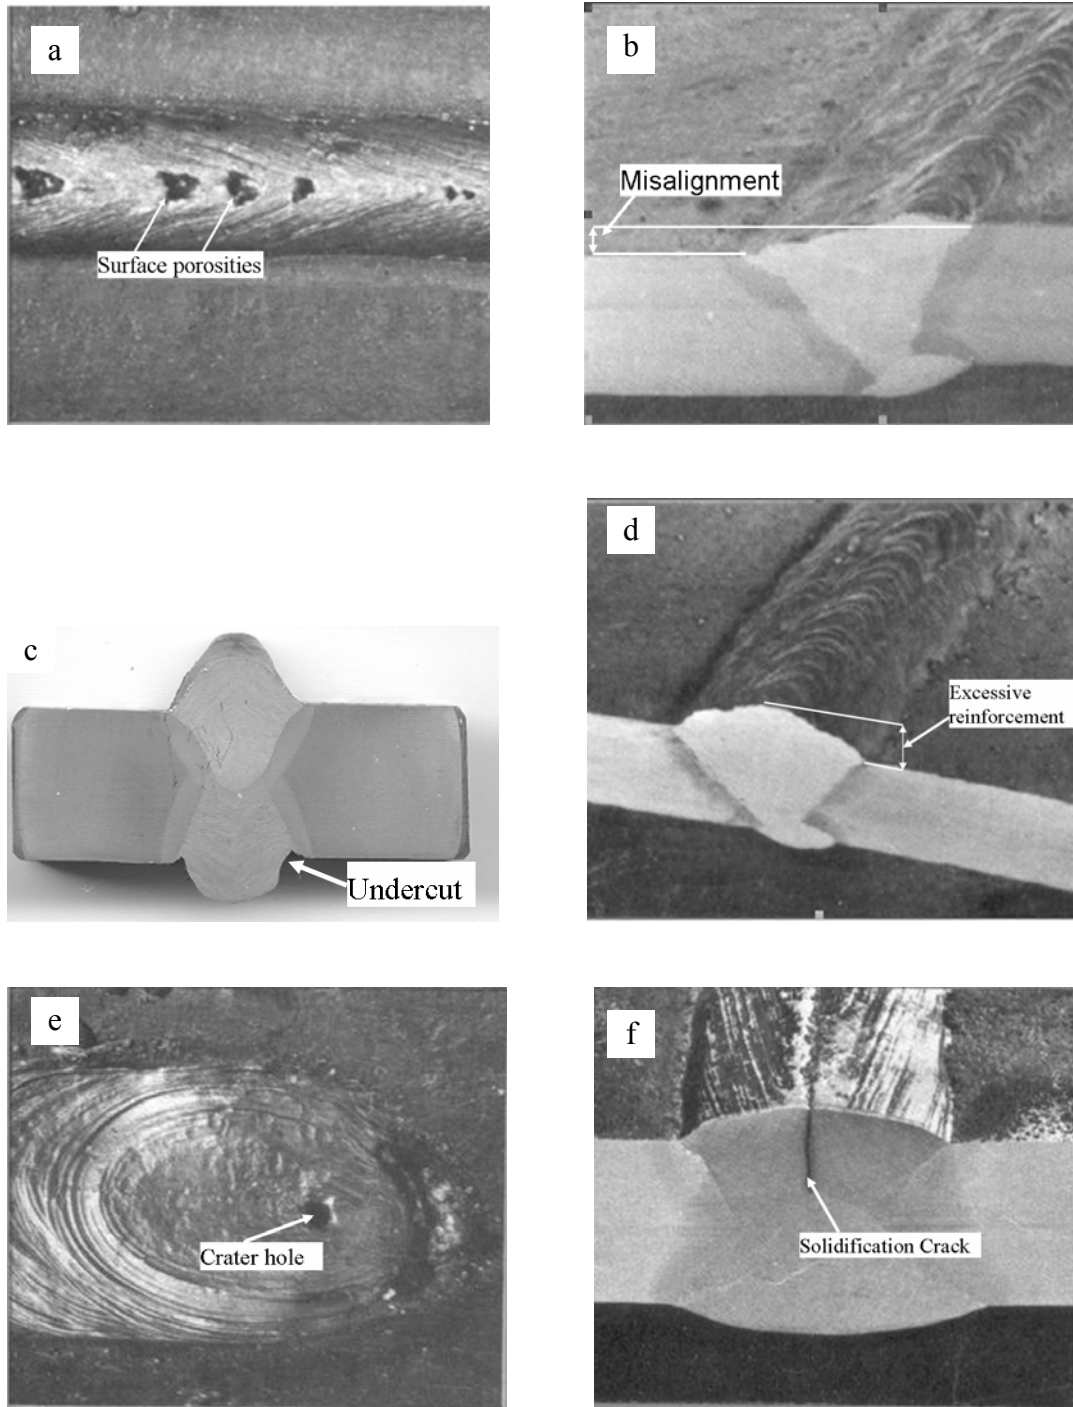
Typical examples of surface defects: (a) surface porosities, (b) misalignment, (c) undercut, (d) excessive reinforcement, (e) crater hole and (f) solidification crack [21].
